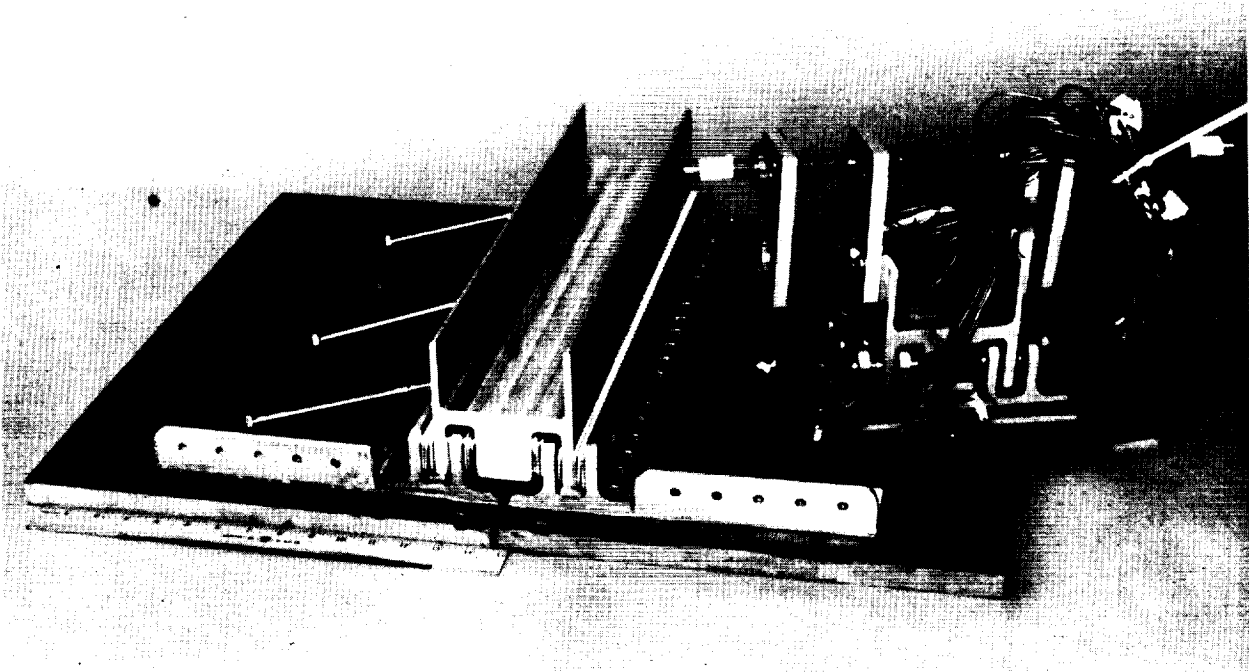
SLIDING JOINT LARGE TEST PANELS ASSEMBLED WITH SMALL TEST PANEL RESTING ON TOP
